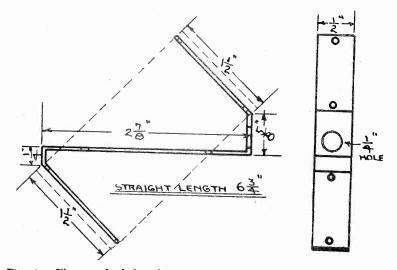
The standard for the rotor which is bent out of heavy brass strip, and makes possible the 180° coupling.
